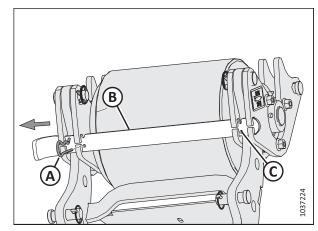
Left Gauge Roller in Storage Position – View from Below
